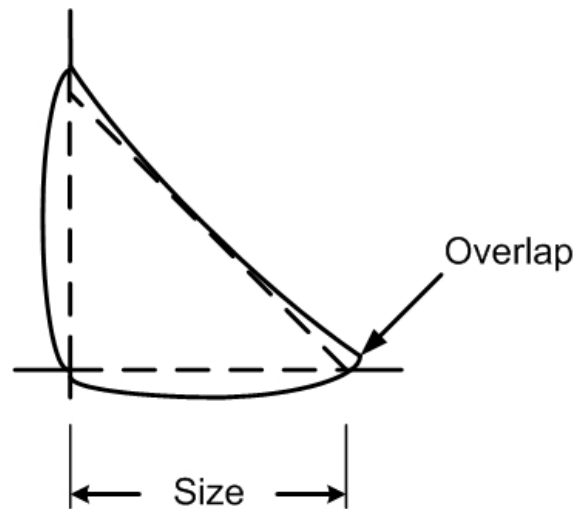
Overlap of a Fillet Weld
